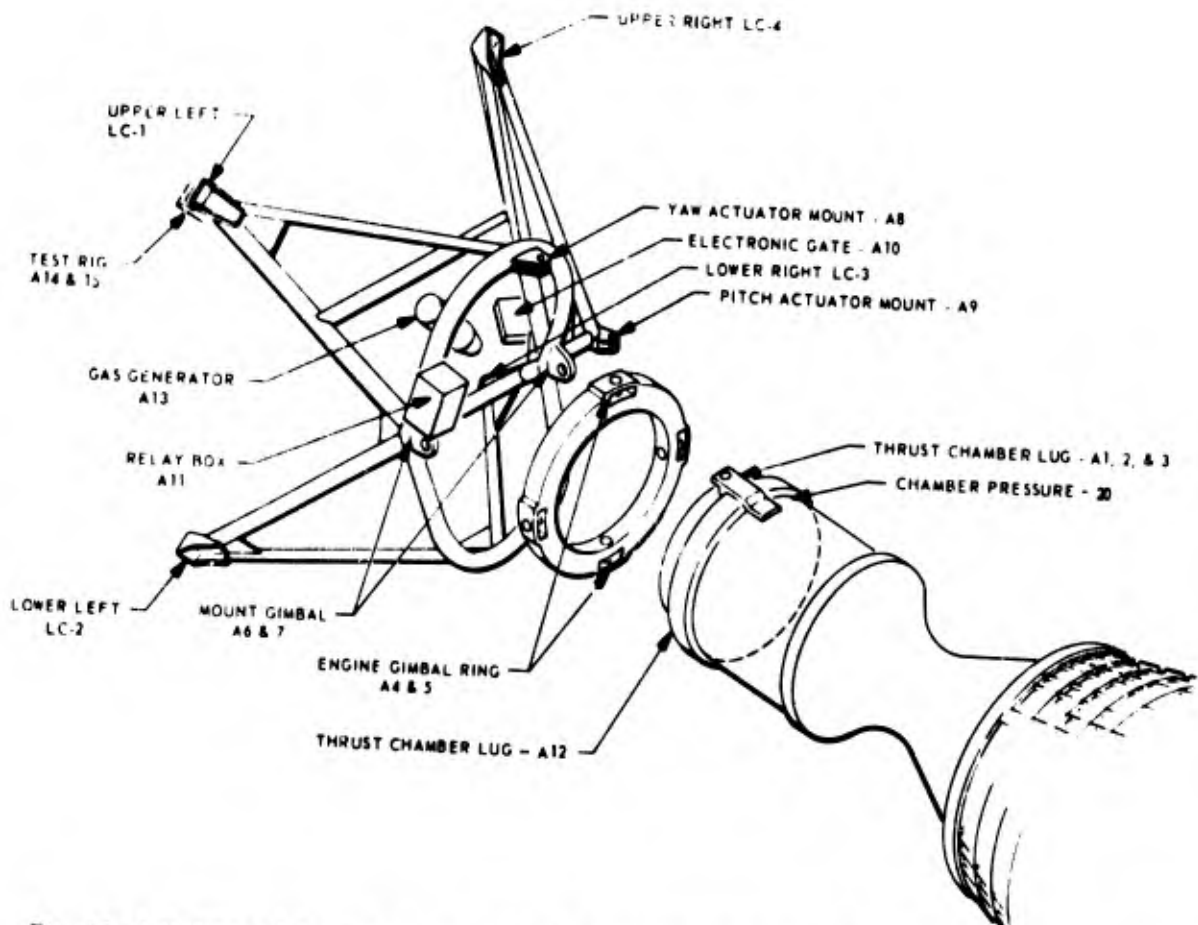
Locations of dynamic measurements on engine and facility thrust mount; hot-fire tests
